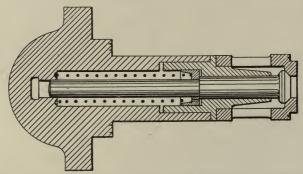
HIGH PRESSURE DISCHARGE VALVE MULTI-STAGE COMPRESSOR.
